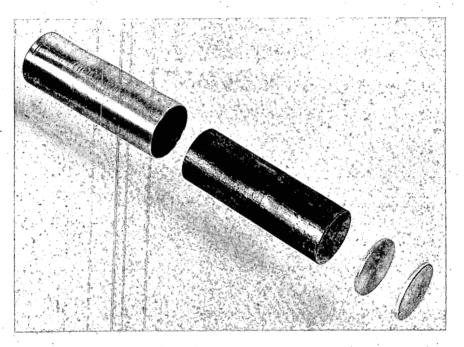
Exploded view of a 4-in. slug and can assembly.
